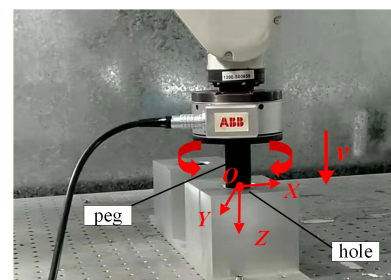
Setup for clearance-fit peg-in-hole assembly.
